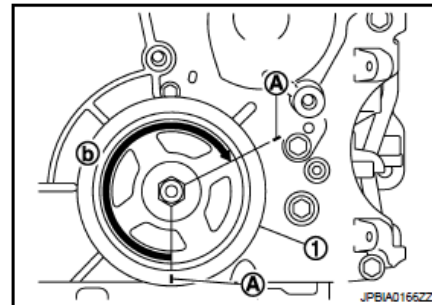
Aligning No. 5 Cylinder At TDC Of Compression Stroke
